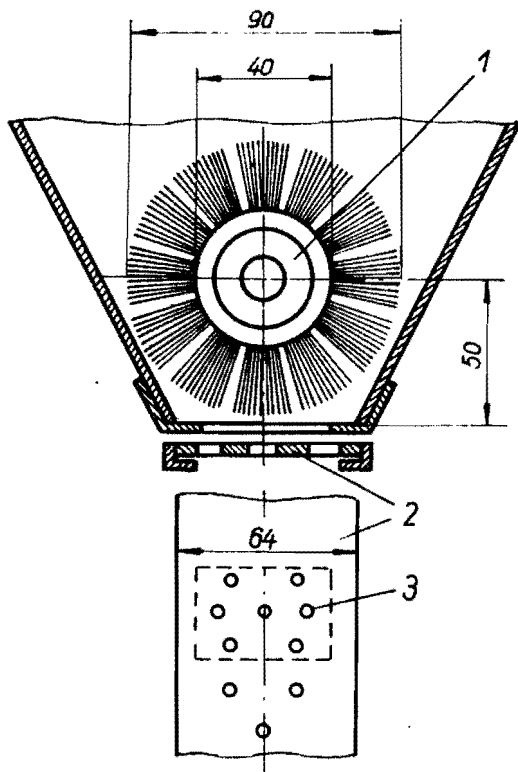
Example of a brush-type device for sowing grass seeds: 1—brush roller; 2—sliding plate for adjusting the rate of seeding; 3—openings releasing seeds.
